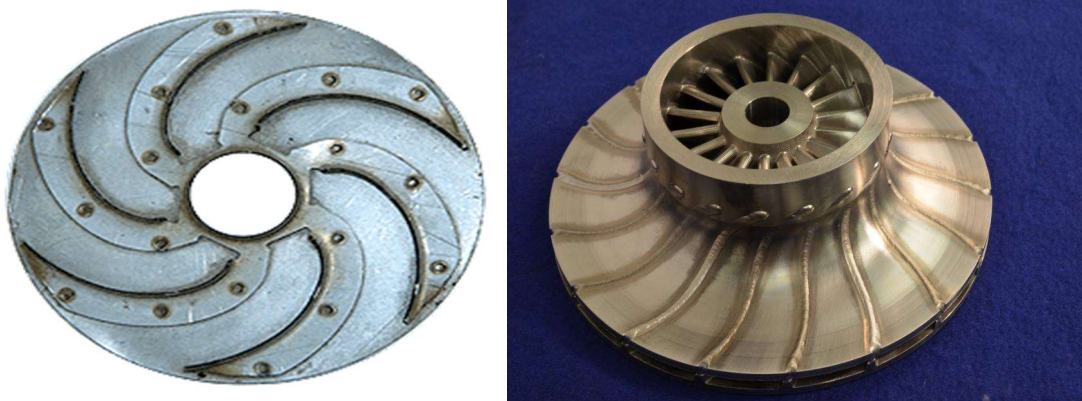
Welded impellers (Source: PTR Welding Services)
